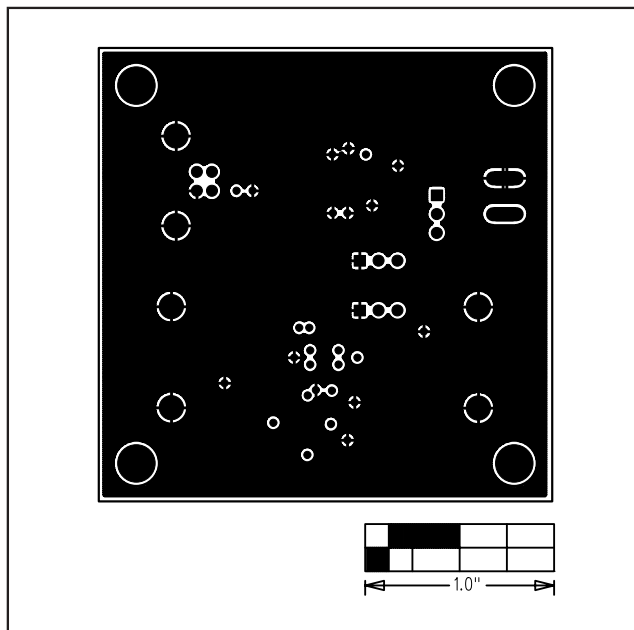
MAX4983E EV Kit PCB Layout—Inner Layer 2
